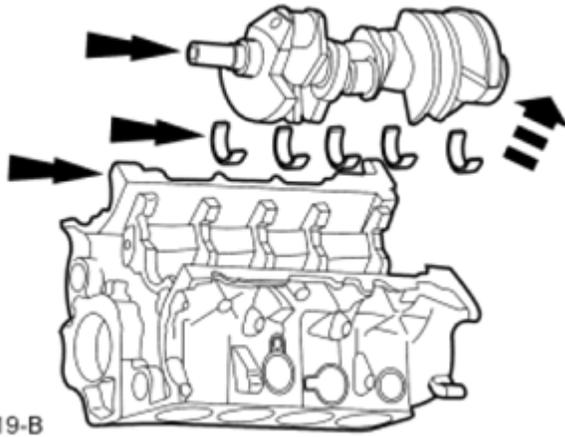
Locating Crankshaft, Upper Crankshaft Main Bearings And Upper Thrust Washers From Cylinder Block
